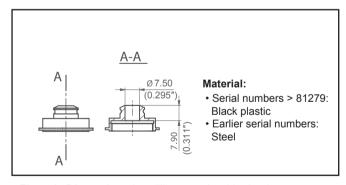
Dimensions in millimeters (and inches) and material spec. of Ear Canal GR1151
